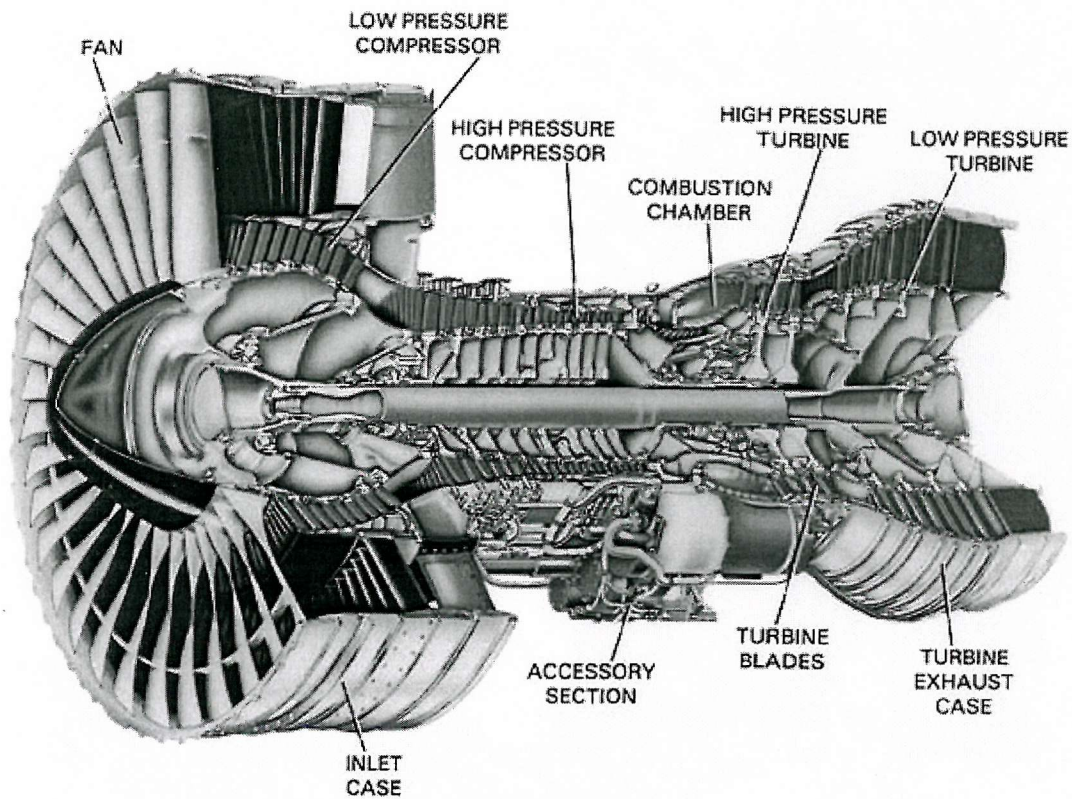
Cut-away drawing of a Pratt & Whitney PW4000 turbofan engine, showing principal components.
